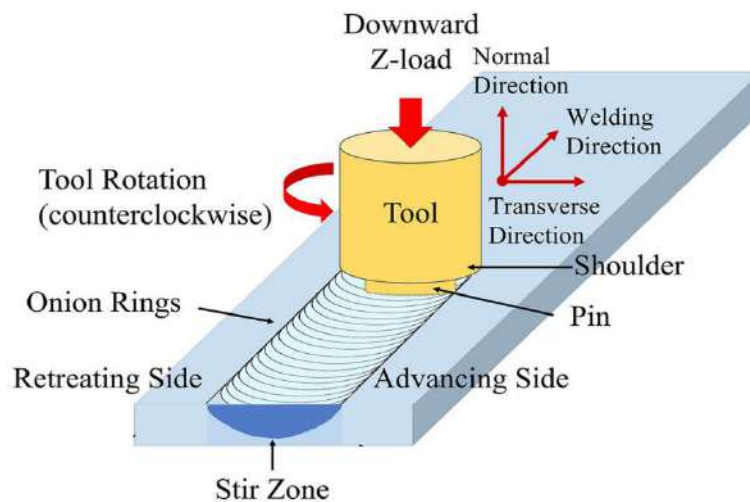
Friction Stir Welding terminology (Lin et al. 2020)
